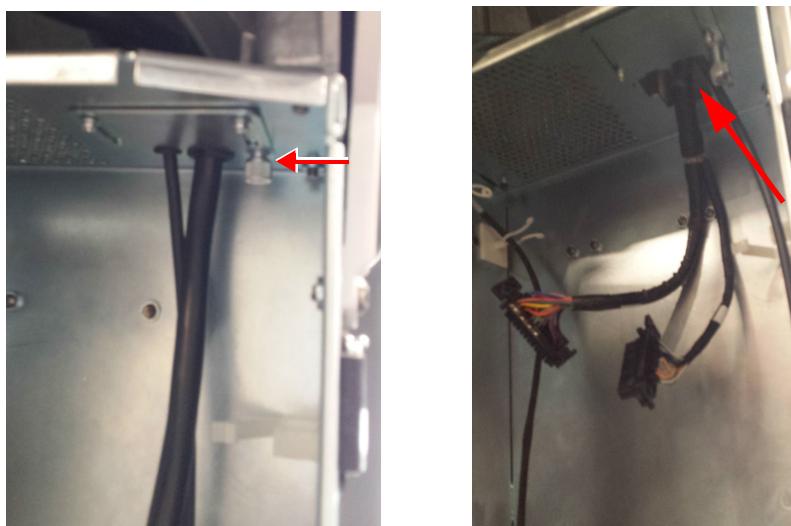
Disconnecting MPB TO COCKPIT CABLE
